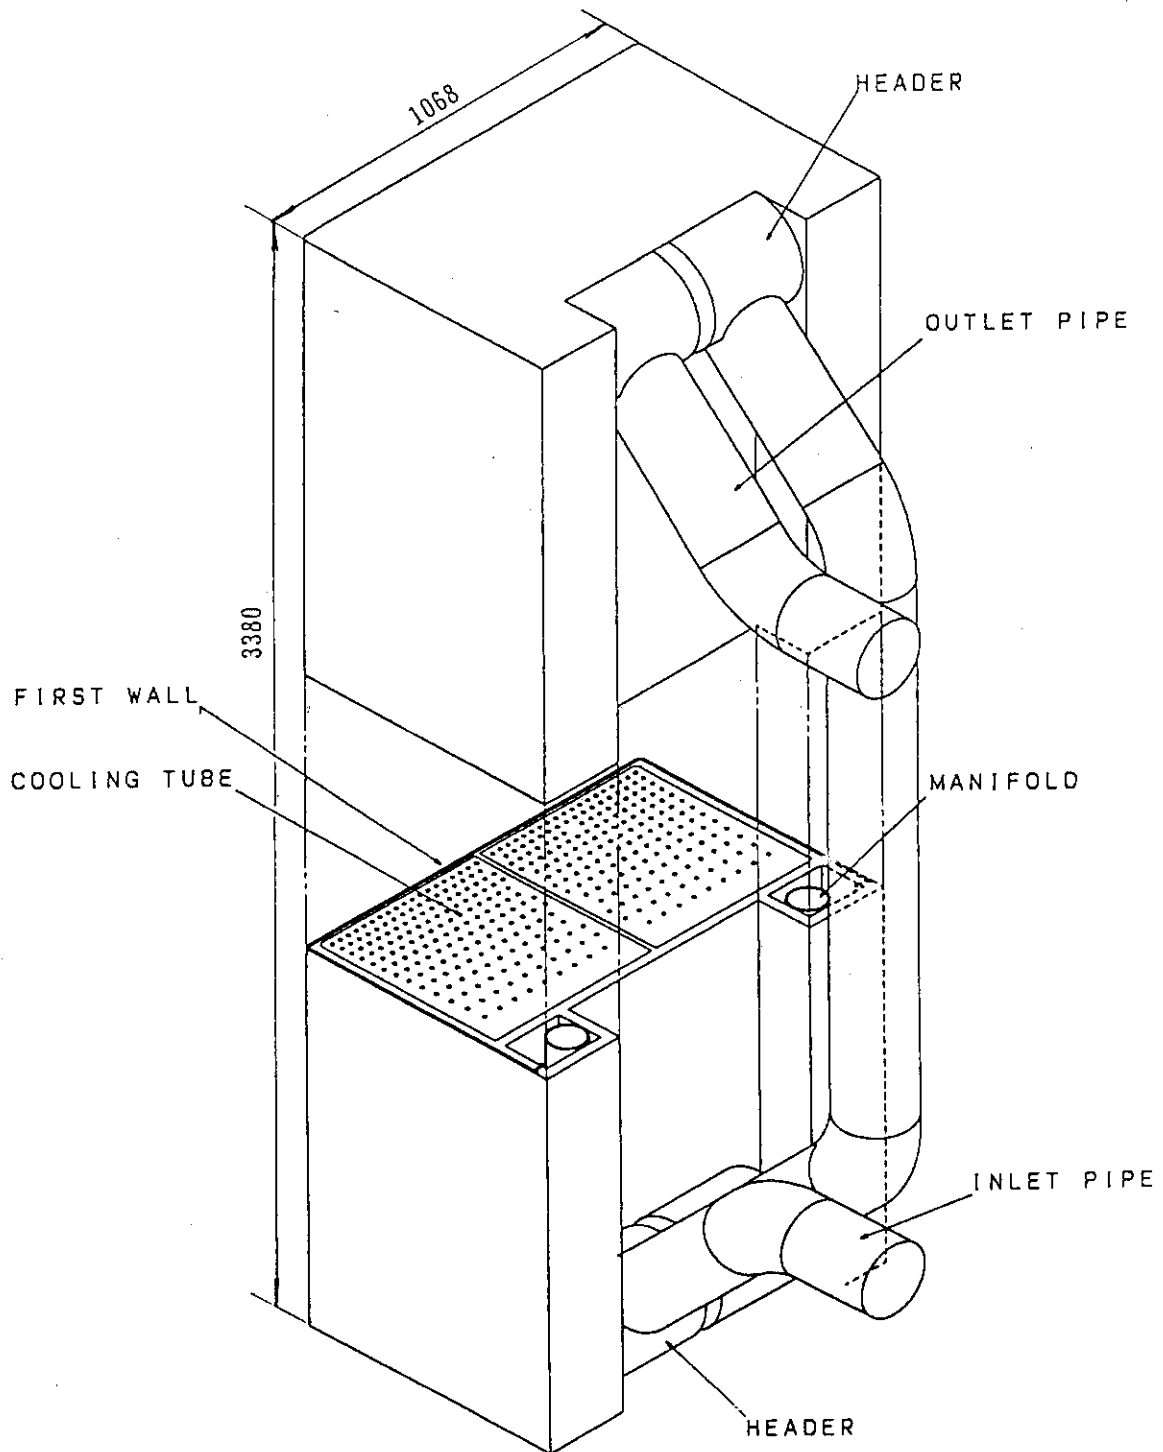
Schematic view of helium-cooled test module for ITER testing (breeder/multiplier mixture type)
